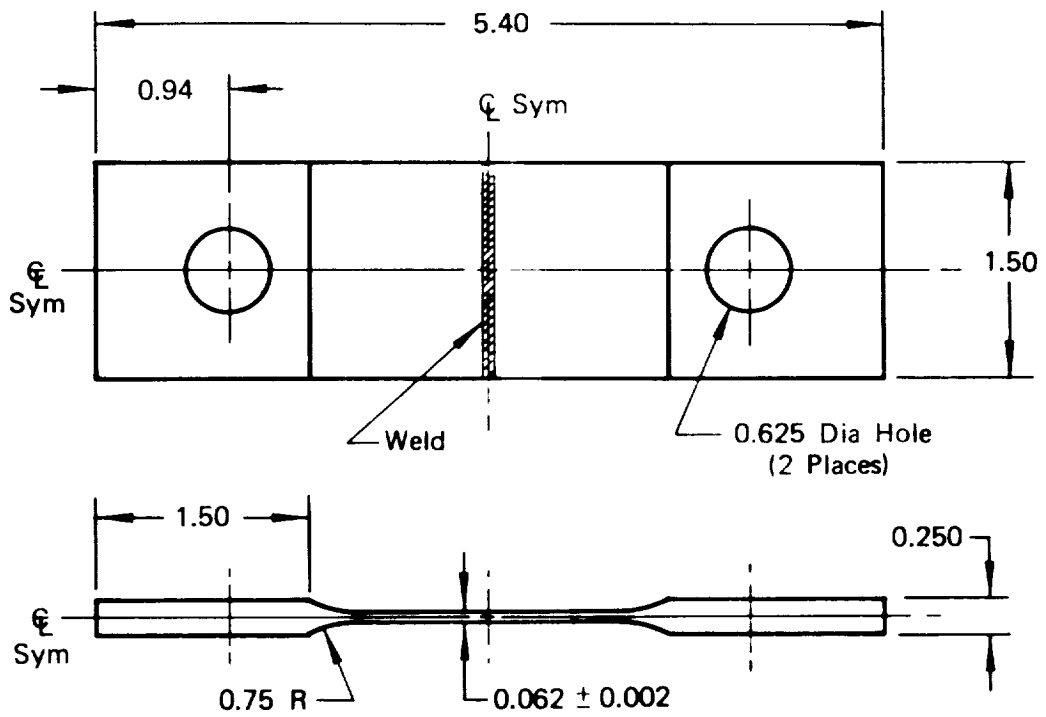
WELDMENT FRACTURE SPECIMEN (PART II)
